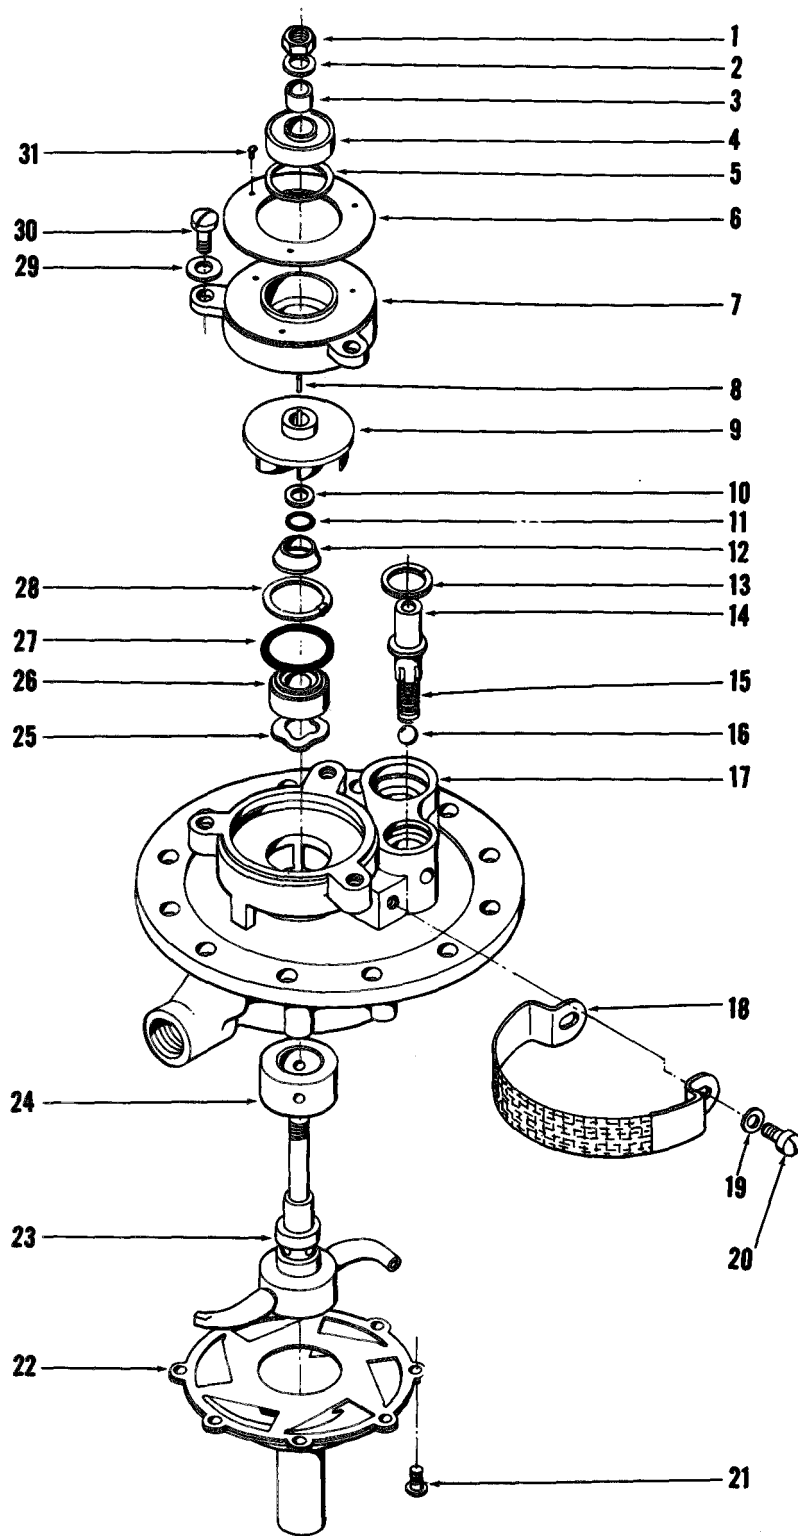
Exploded View of Air Turbine Driven Centrifugal Fuel Booster Pump.
